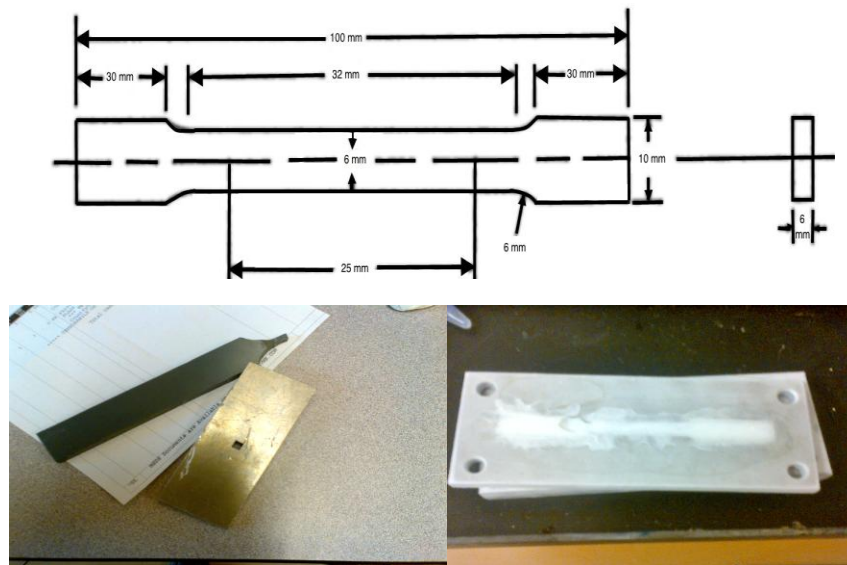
ASTM E8 standard size (Appendix B) with dimensions, and mold for compressive samples (left) and tensile samples (right)
